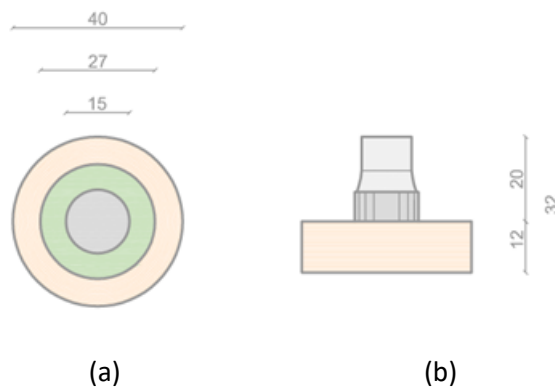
Design of the pancake probe in units mm, a) bottom view and b) front view.
